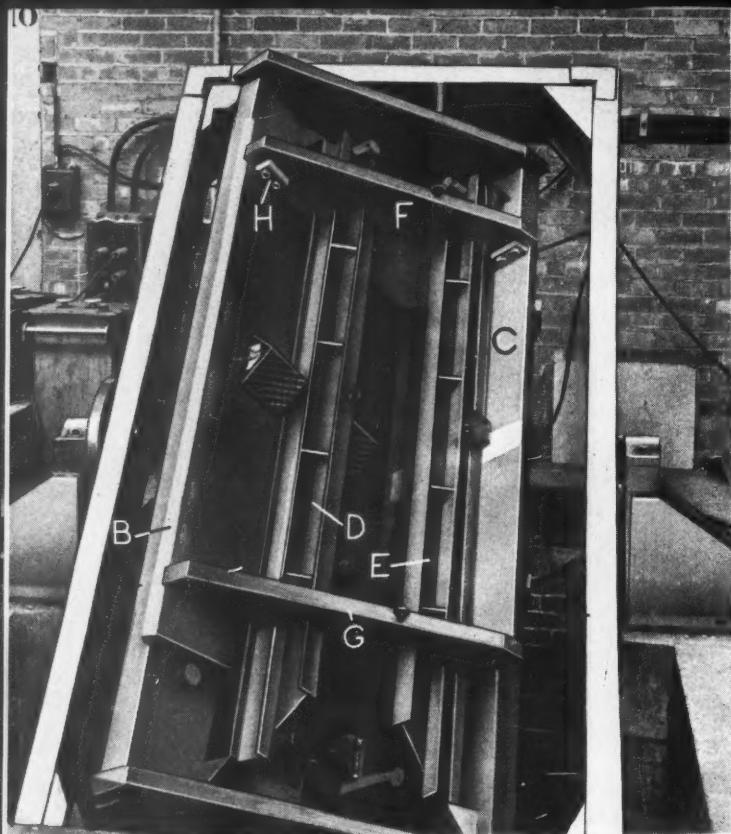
Manipulator and jig for welded nose-armor assembly. Main outer frame and inner jig frame can both be swiveled 360 degrees
